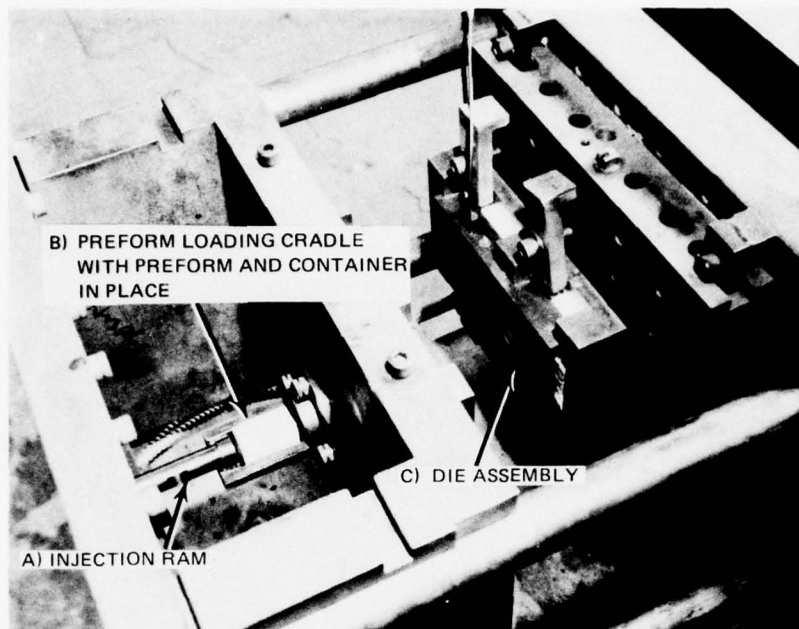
Machine Casting Unit Showing A) Injection Ram, B) Preform Loading Cradle with Preform and Container in Place and C) Die Assembly
